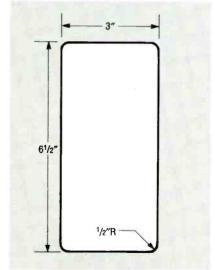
OUTLINE FOR THE TRANS-DUCER MOUNTING PLATE to be cut from 0.063-inch stainless steel plate.
